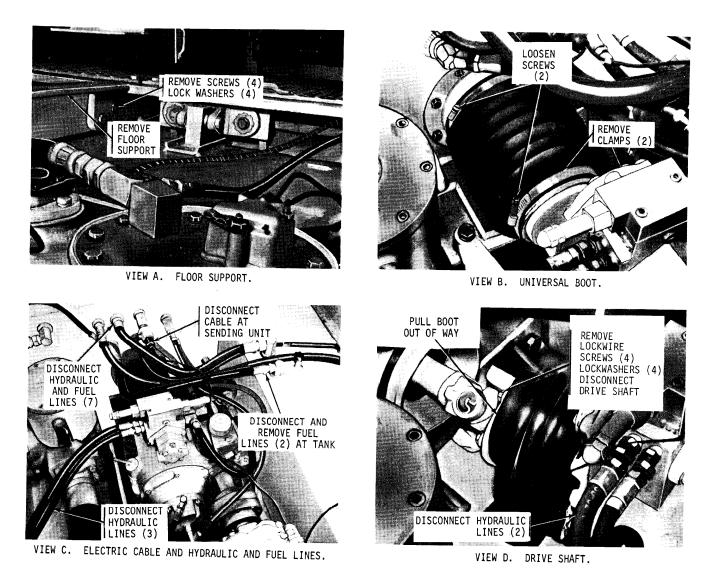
Mechanical transmission and main hydraulic pump assembly-removal and installation (Sheet 1 of 2).
